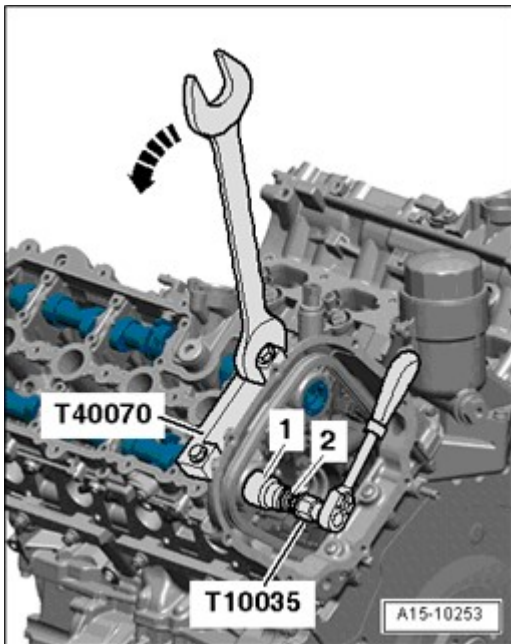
Adapting Camshaft Adjuster Screw And Socket 24 To Exhaust Camshaft
